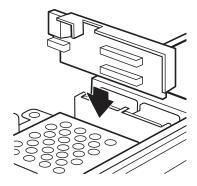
Lowering the SAS IF Assembly into the Chassis
